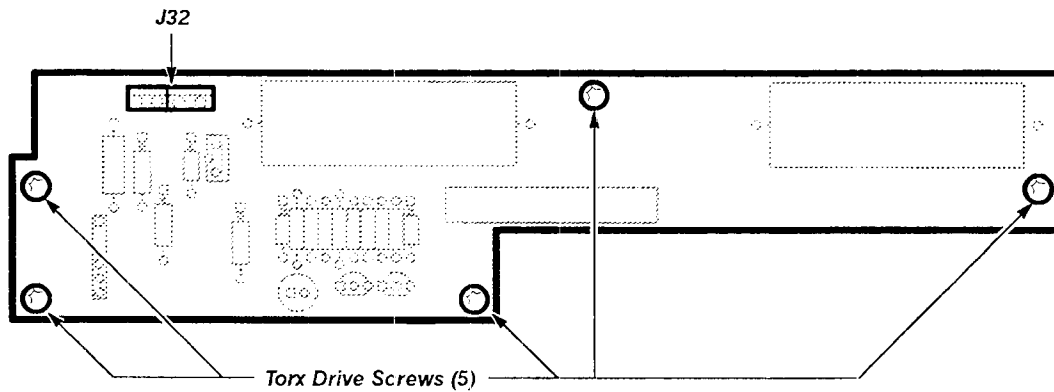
Removing/Replacing the A25 Degauss Board
